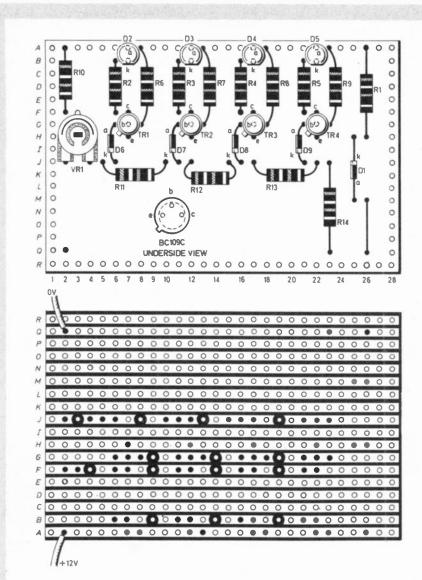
The stripboard layout for the Voltmeter. L.E.D.s D2 to D5 must be in the positions shown.
